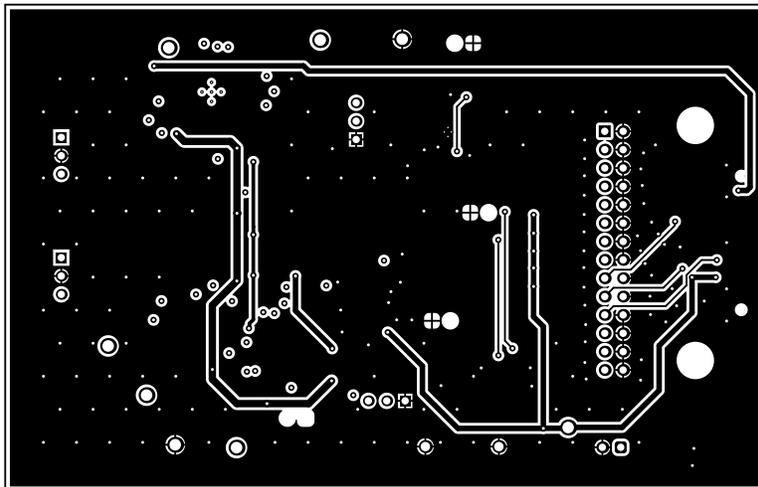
PCB Layout for the ADS1282EVM (Bottom Layer)
